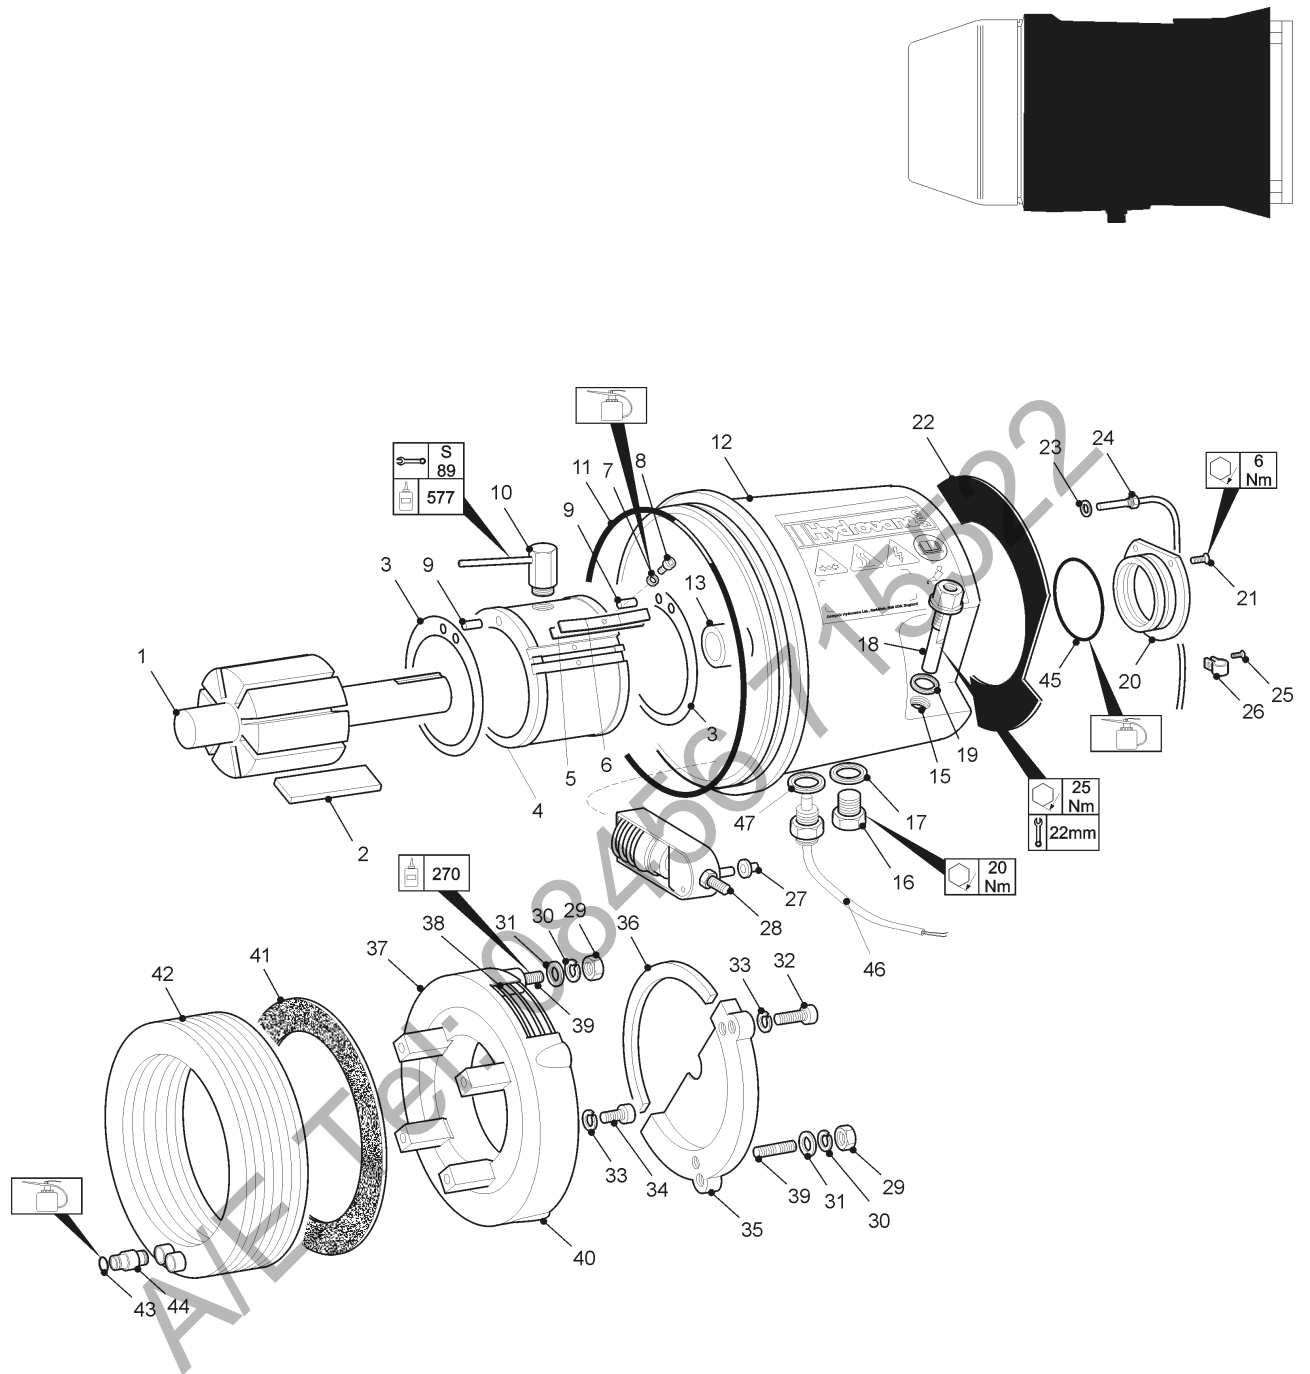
B - Oil Chamber, Rotor Stator Unit, Lantern
